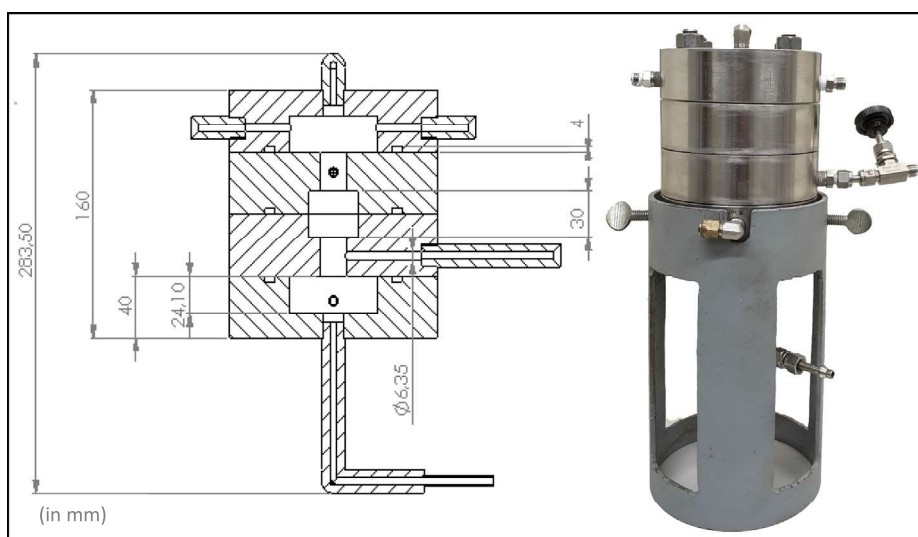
CAD drawing (with measures in mm) and picture of the main corps of the apparatus.
